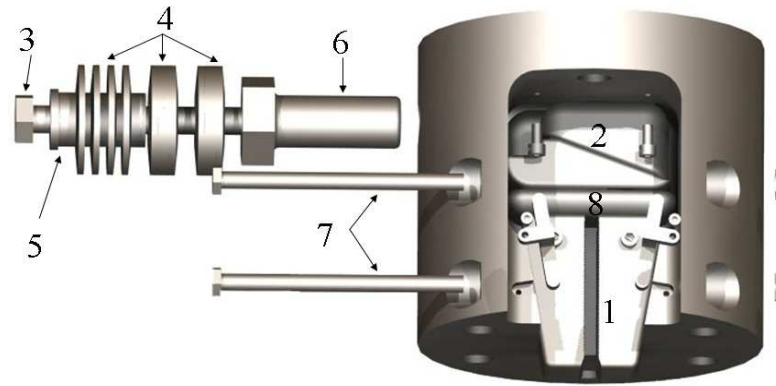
Exploded view of the clamps for tension and compression fatigue loading.
